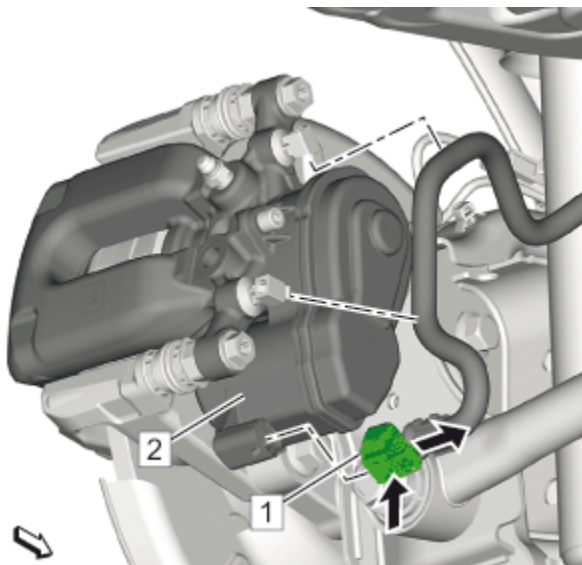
Brake Caliper Assembly And Lectrical Connector
